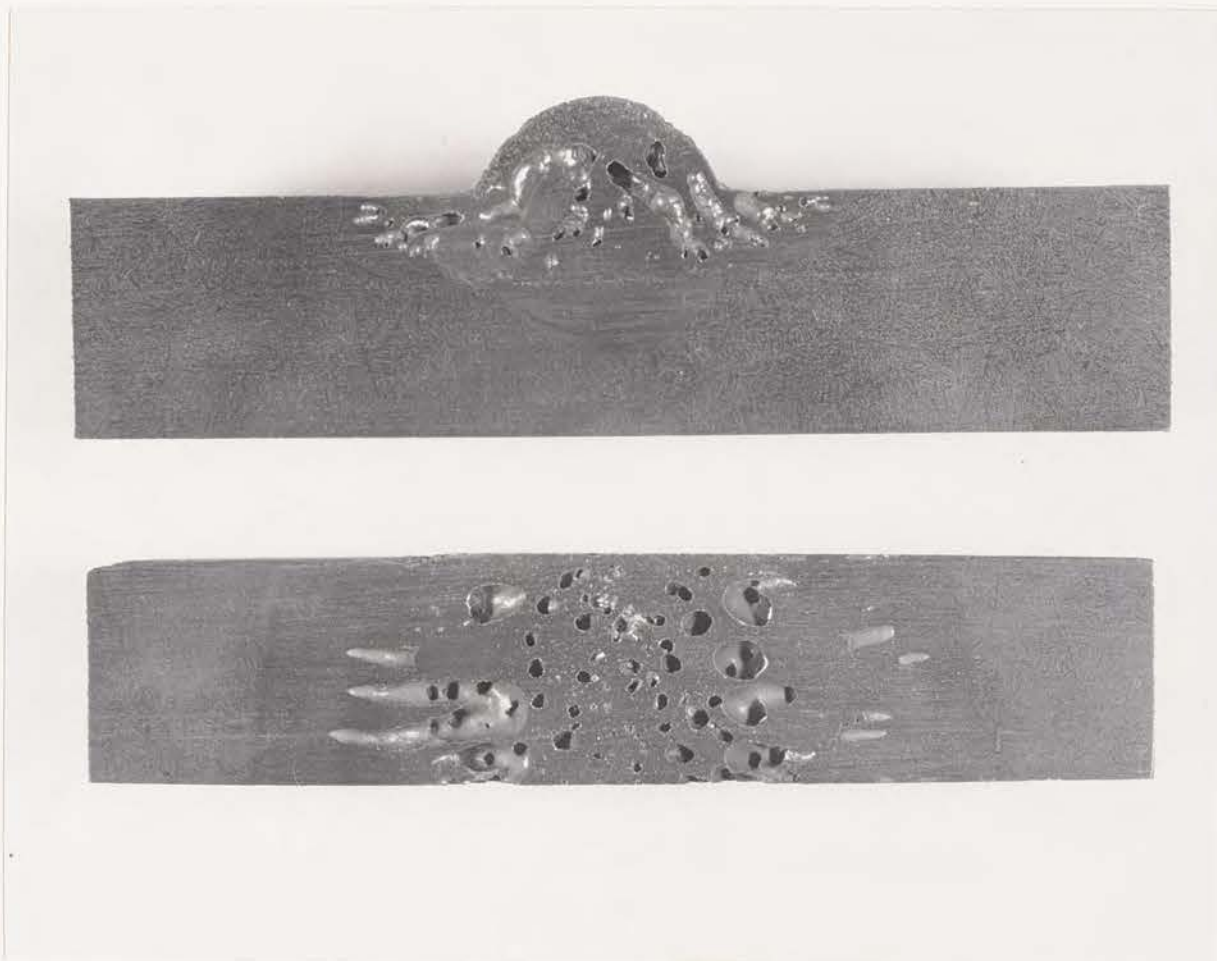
Two tests performed in silica sand molds with cast iron thermite, note extensive porosity in the surface of the specimen.
